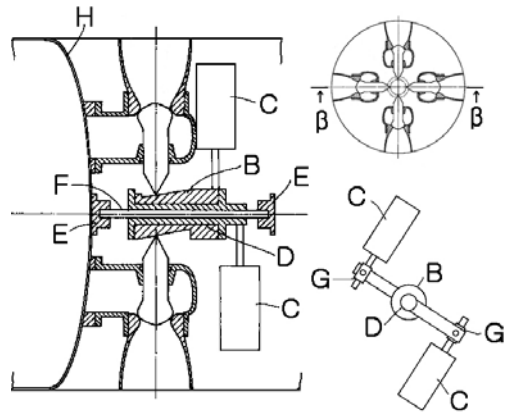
Drive mechanism (Sectional view β - β)[9]
